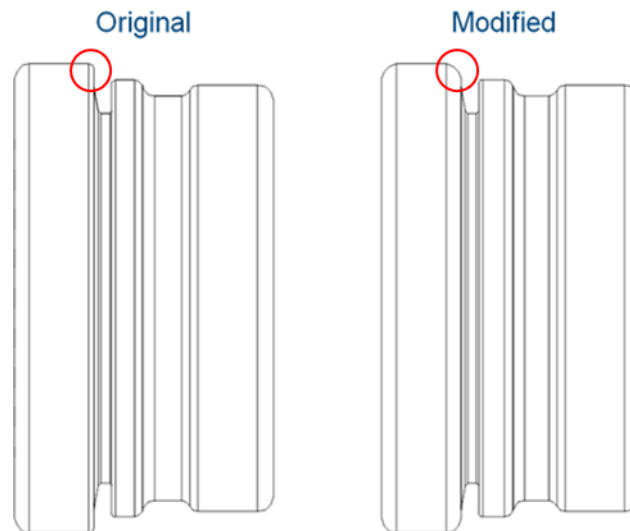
Roll forming tool modification of tool radius due to edge swarf
